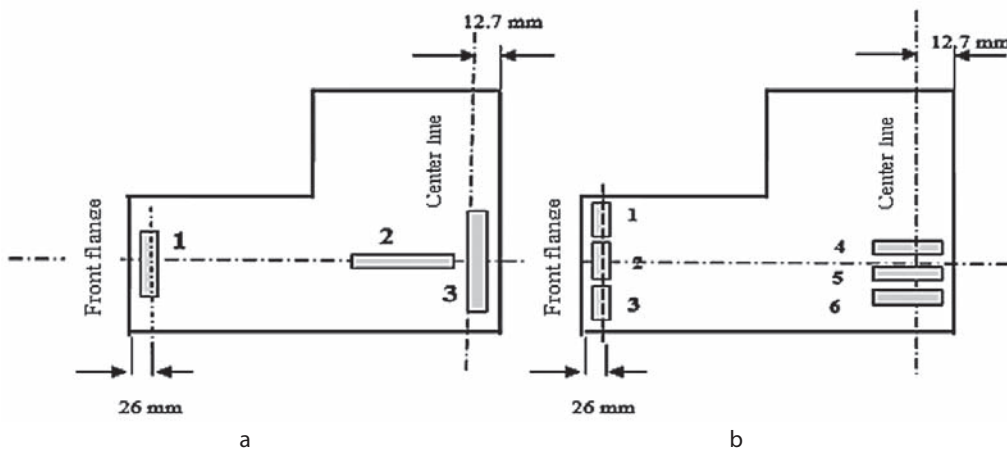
The places of sampling for the piece of flange end type: a - tensile testing; b - bending shock test
